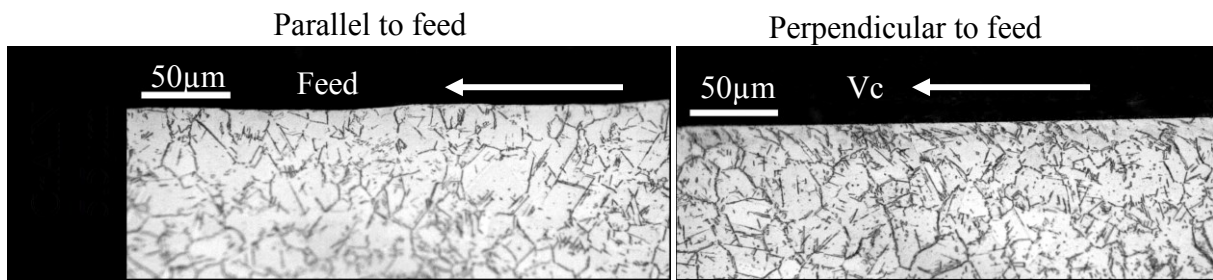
Cross-sectional optical micrographs of machined workpiece sub-surface produced with new CrAlN-5.5μm coated tool at cutting speed of 300m/min
